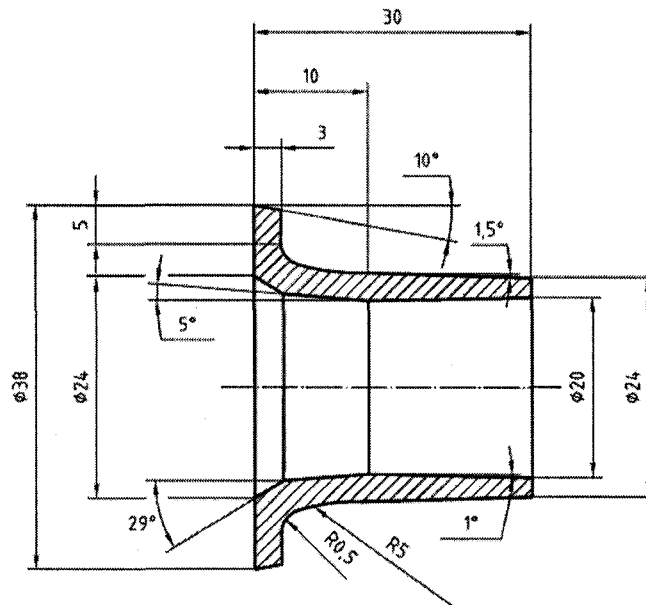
Plastic Mould Used to Create a Hollow Cylindrical Test Specimen (ISO 15509)
